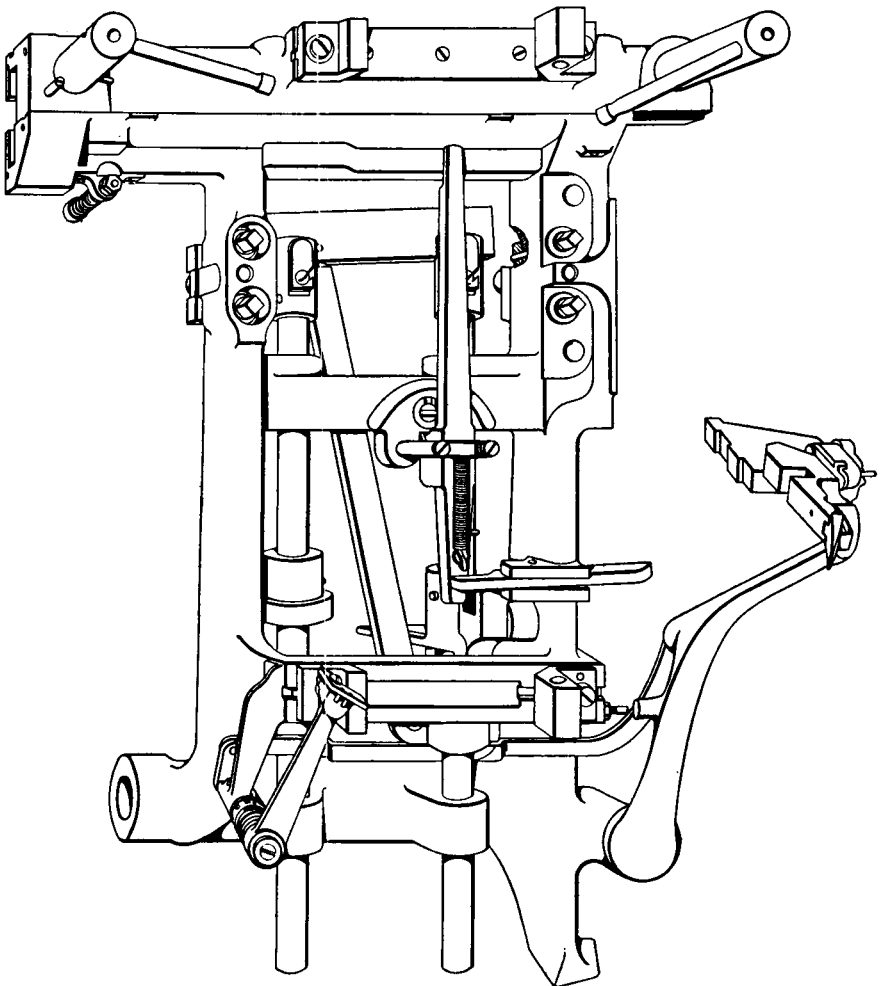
View of vise frame with first elevator slide, galley, etc., removed.
